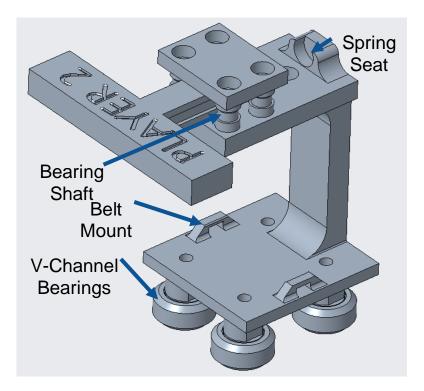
The paddle assembly showing the sliding spring mechanism, the belt attachment points, the v-channel bearings, and the modular design
